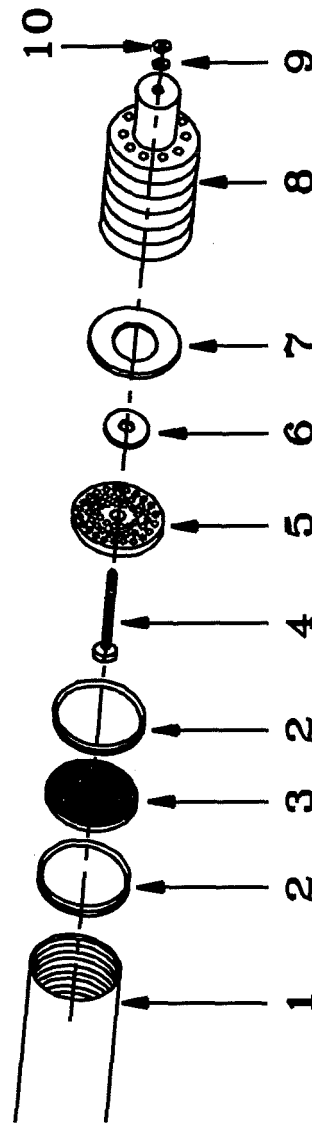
Schematic arrangement of the flapper valve assembly for the three developed combustors.
